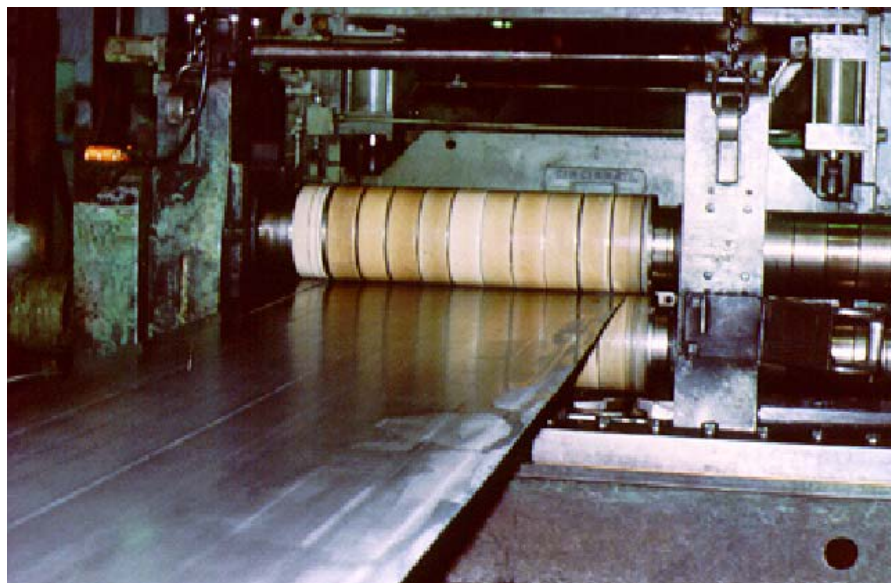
Slicing of steel sheet to strips (Lane, 2005)
